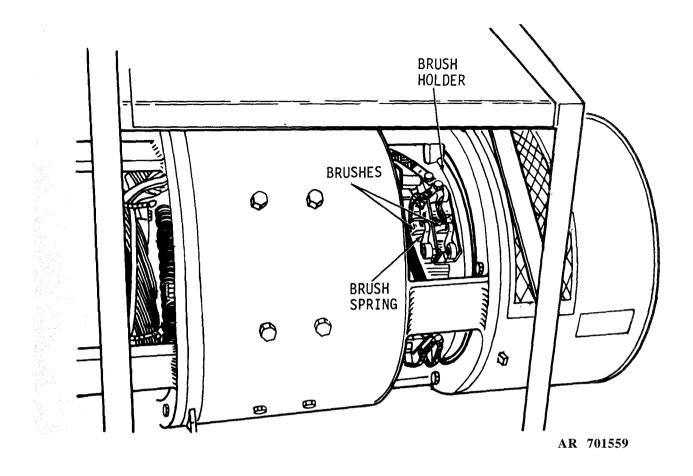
Generator-welder brushes, removal and installation.
